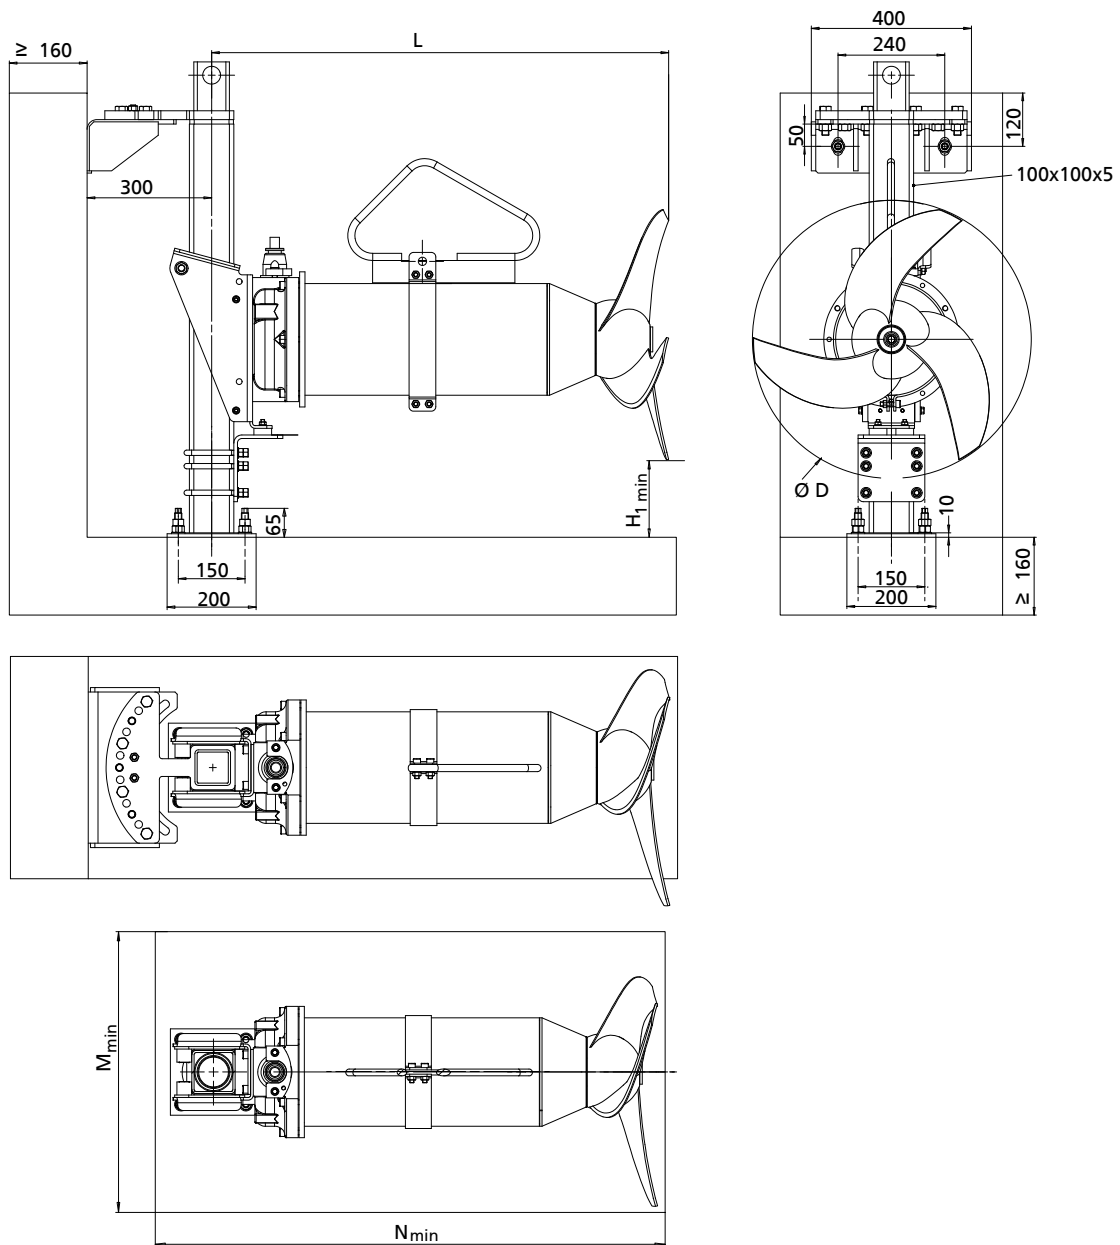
Installation with accessories 22 - Amamix 400 (size 4135 only) / 600
